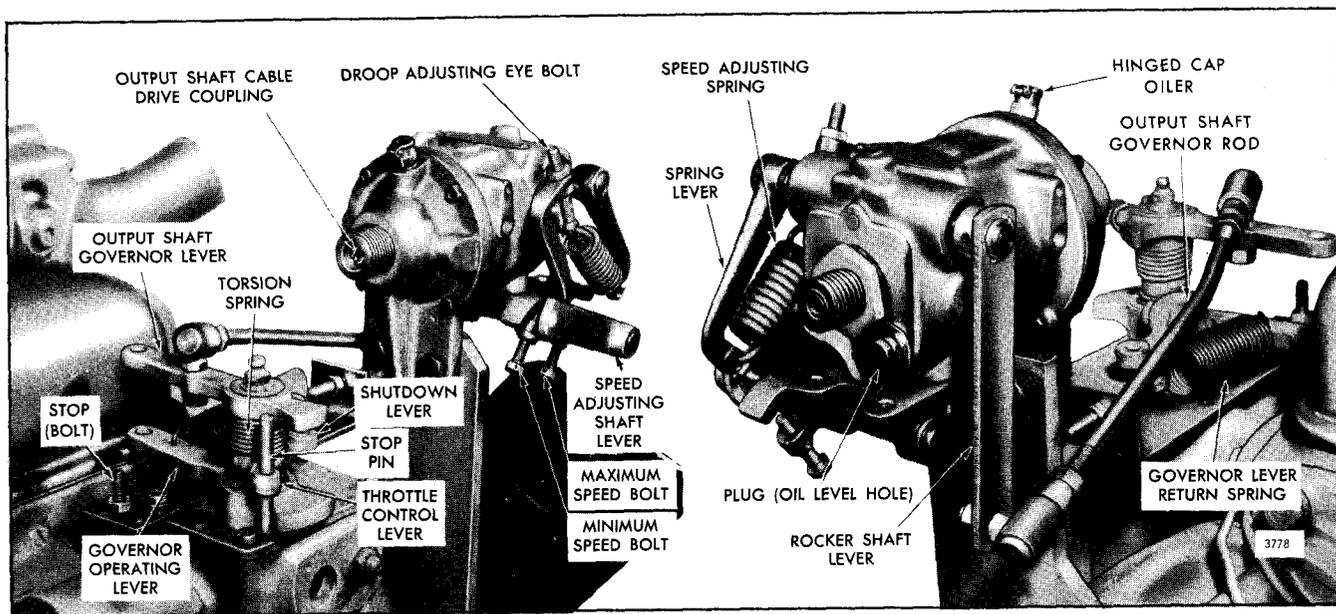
Flexible Shaft Driven Output Shaft Governor and Linkage
